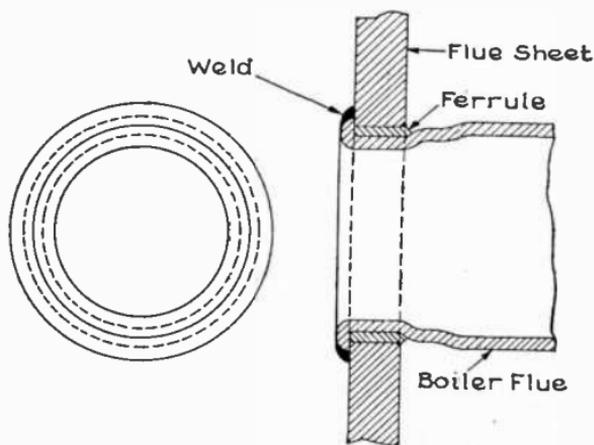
,102 and 8,103.—*Lesson 14. Continued.* Cross section of flue of locomotive showing method of welding tube to flue sheet.
